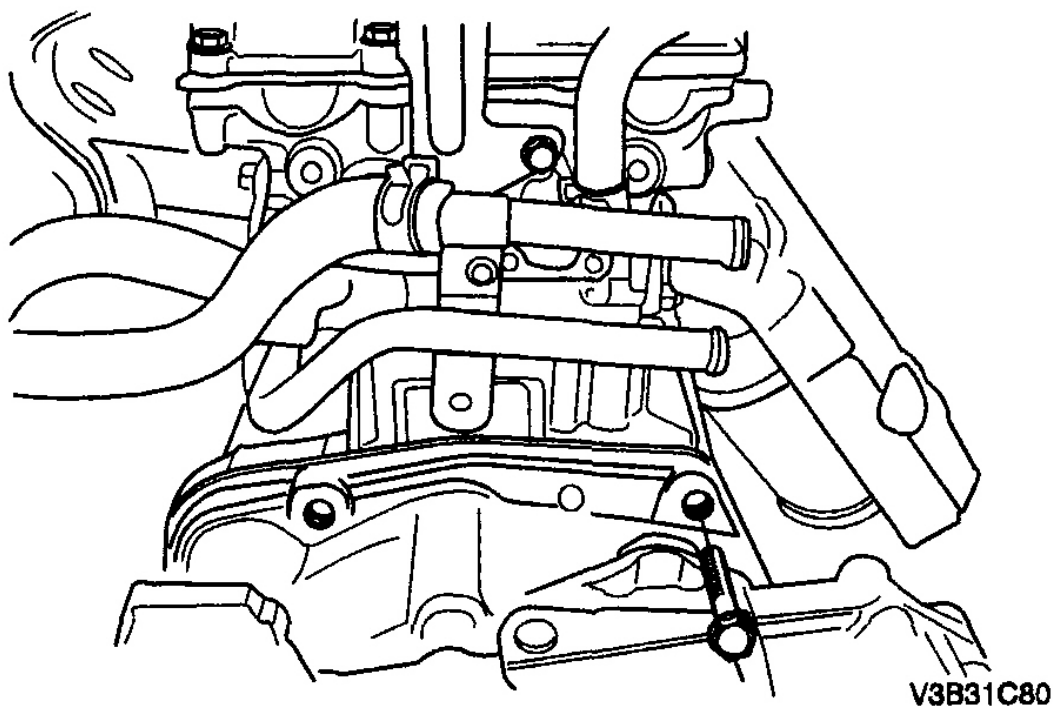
Removing Transaxle-To-Engine Block Bolts
